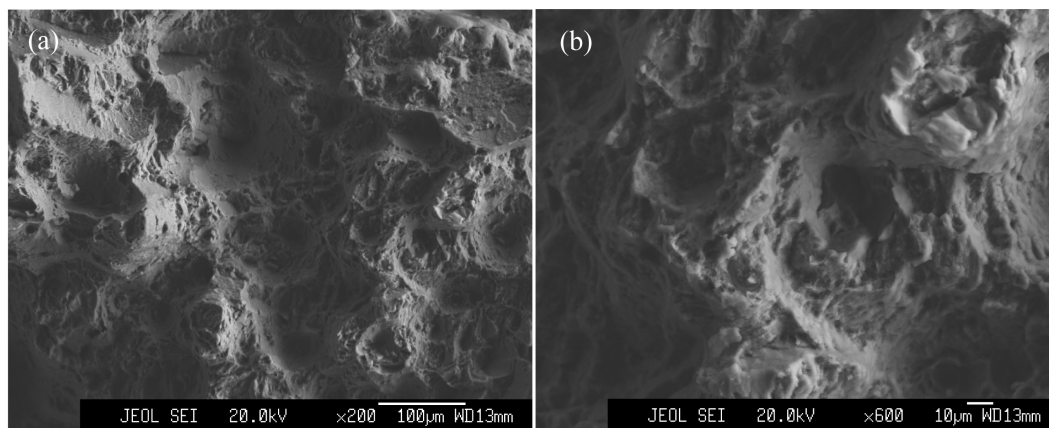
Tensile fracture morphology of AlSi10Mg sample fabricated by SLM
